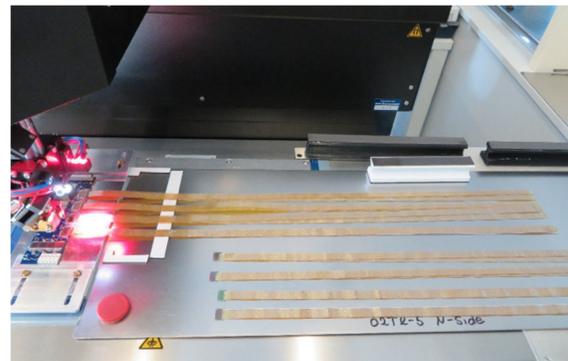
Initial Module assembly step: Attachment of STS-XYTER ASICs via TAB bonding to microcables, yielding “chip cables”.
